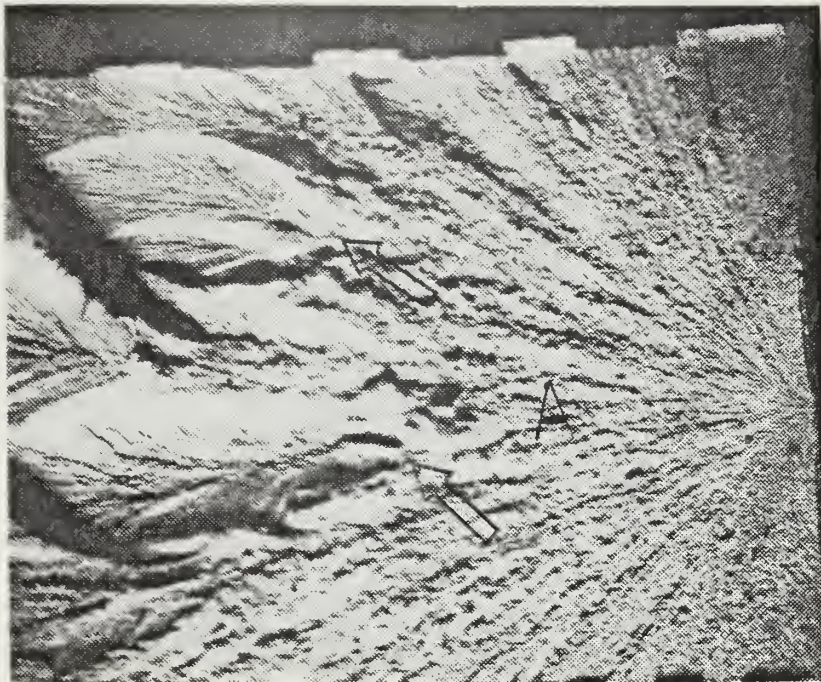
Macro-fractograph of a tensile test specimen from specimen group RQ showing that fracture initiates from the surface of specimen. Chevron marks on fibrous zone (A) are evident. Two tear-drop shaped concave fractures means that crack halted at the root (arrow) of the tear drop. X18.
